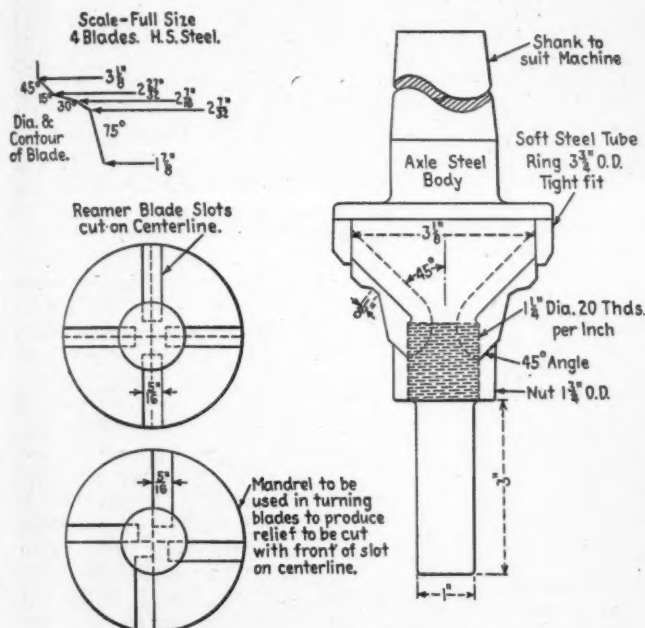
Formed reamer for reconditioning worn exhaust valve seats on welded Diesel engine cylinder heads
